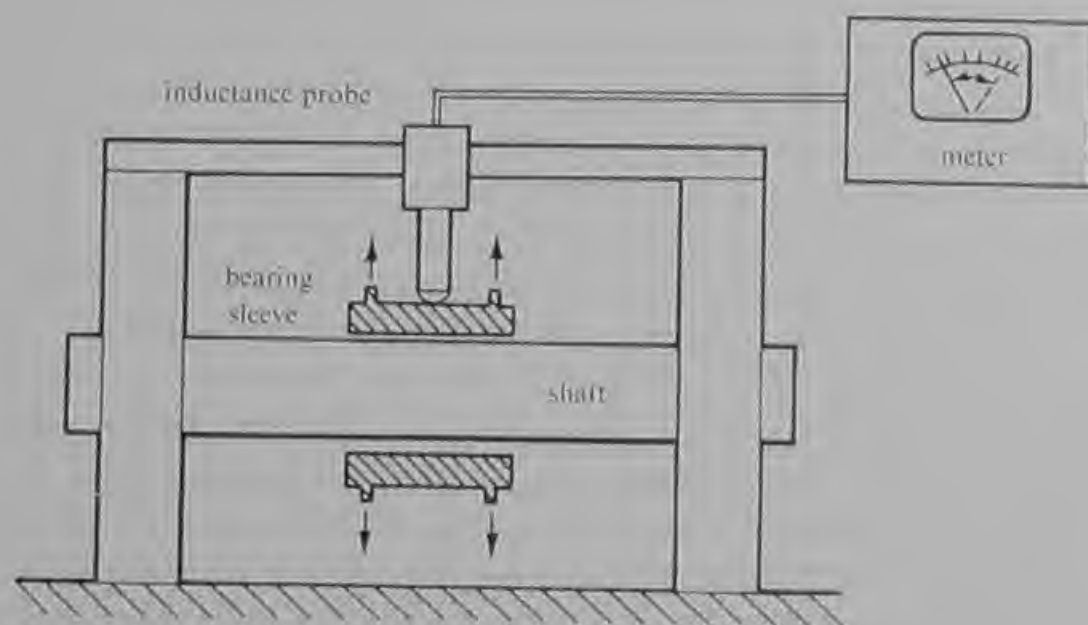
Measurement of journal bearing clearance by attempting to establish size of the journal diameter and bearing bore diameter
